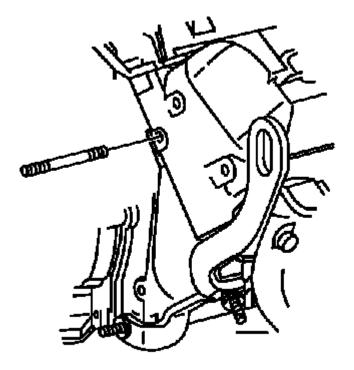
View Of Power Steering Pump Bracket Stud Courtesy of GENERAL MOTORS CORP.
